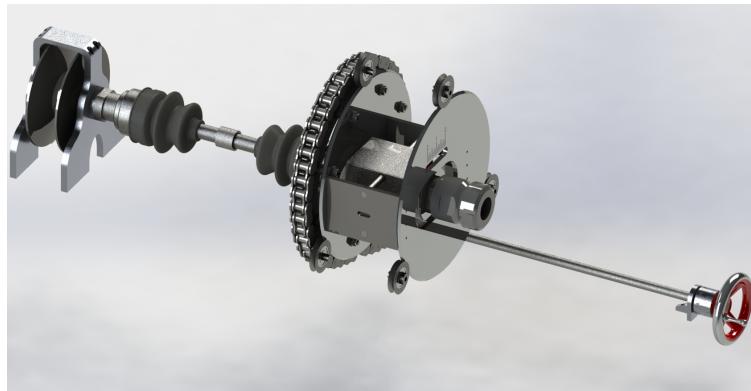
SolidWorks rendering of the overall headstock driveshaft assemblies
